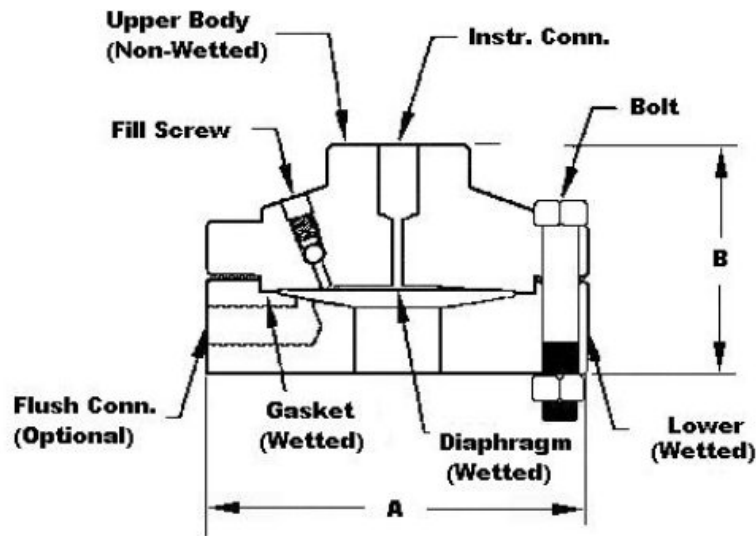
Seal Dimensions (Threaded Process Connection Seals)
